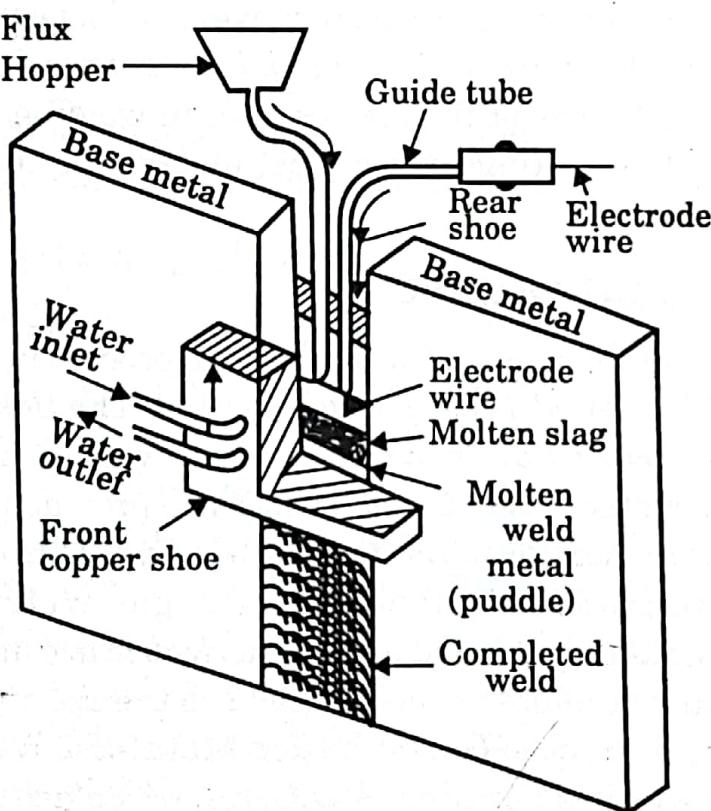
Schematic diagram of Electroslag welding. The copper shoe at the front side is shown in section to show the welding details.
